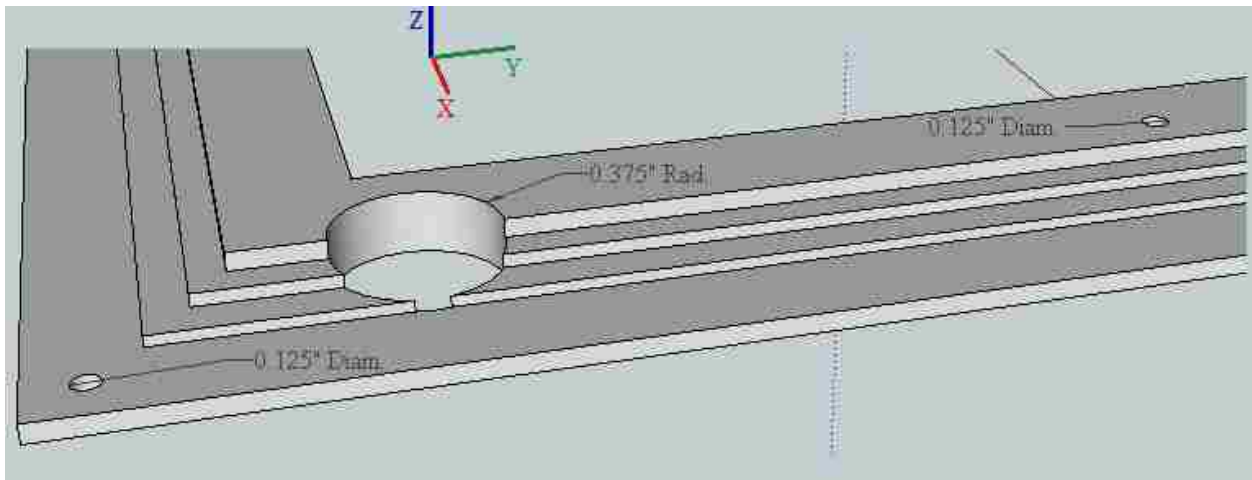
Orthogonal view of the 20x20 cm² lower trimmer lead plate illustrating hole dimensions.
